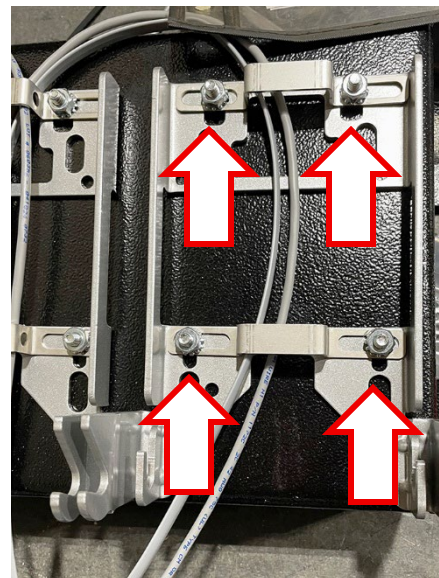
Top View of Hopper Mounting Bracket with four nuts holding it in place. Loosen these four nuts, the mounting bracket slides back & forth.
